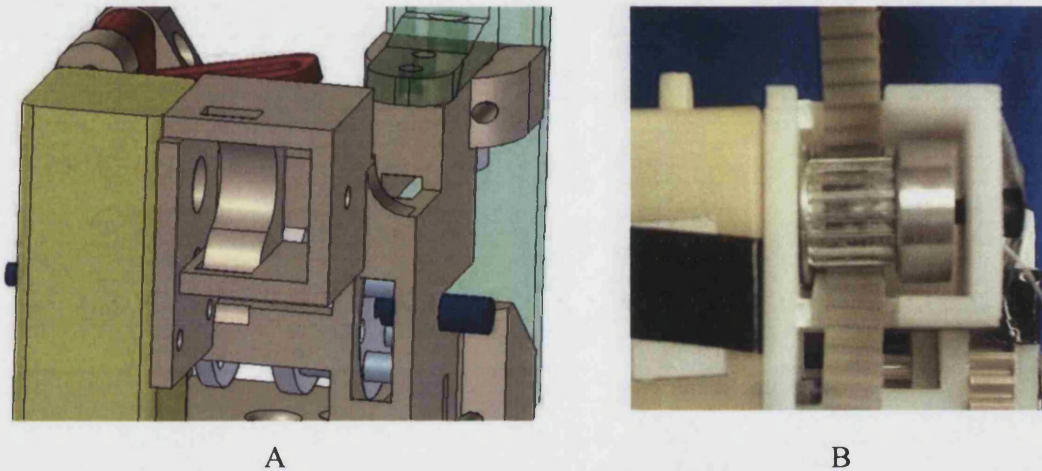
Pitch-up and foot attachment mechanism. A – Solid Edge rendering to show how the control box was designed with a profiled curve included to guide the toothed belt tightly around the pulley. B – Photograph showing the pulley and toothed belt in place. The pulley was bored out to allow the interference fit of an 8 mm rapid prototyped insert, which mates with the motor output shaft at one end and the M3 locating bolt at the other.
